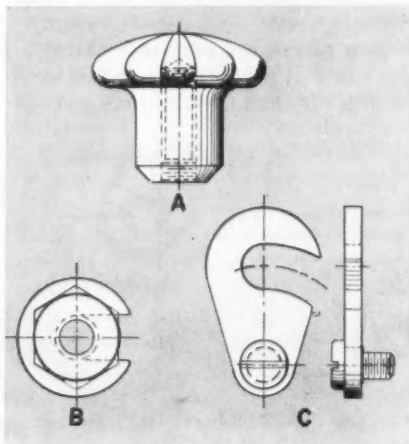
(A) Drawing of hand knob which is made of cast iron and shaped to fit the palm of the hand and the fingers; (B) drawing of horse-shoe washer frequently used with swinging bolt clamp assemblies; and (C) typical shape of swinging washer sometimes used with swinging bolt clamp assemblies.
